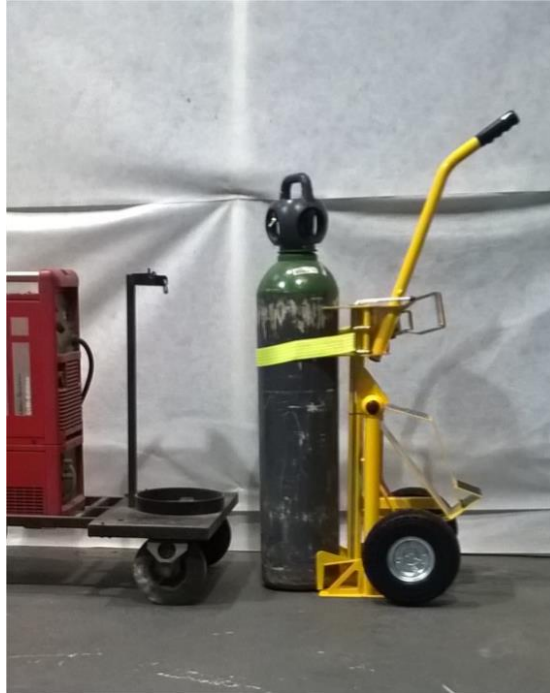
63 kg cylinder ready to be lifted onto welding set platform
